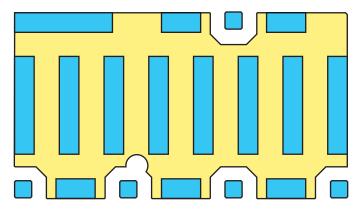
Solder Stencil Superposed on ACFM-7325 Bottom Metal Pattern. (top view)
